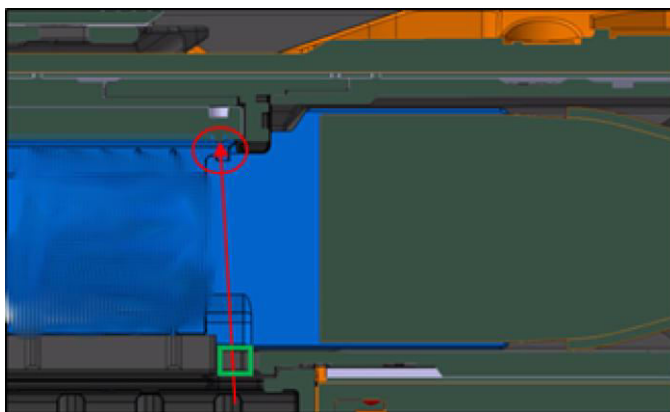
b: Test areas for load contact - Measuring point through test shaft on rivet
